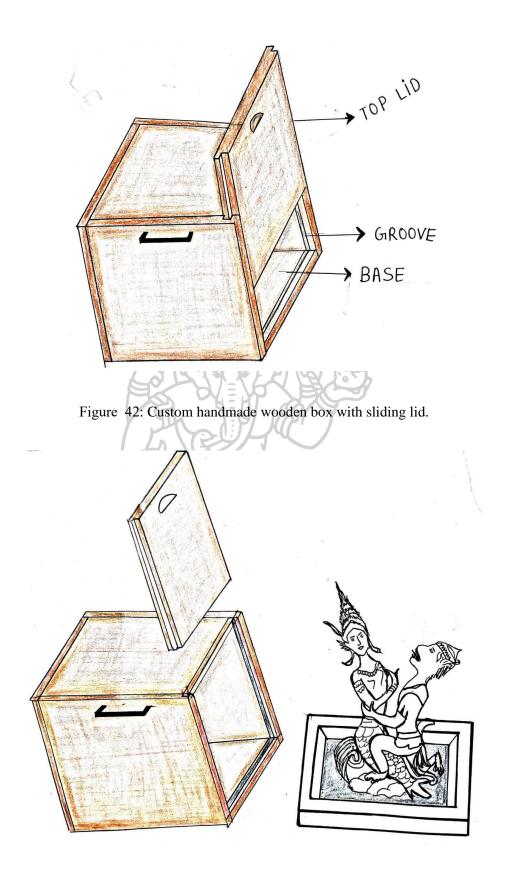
Concept plan of wooden storage box for "Hanuman Suvannamaccha" sculpture, with Ethafoam tray.
